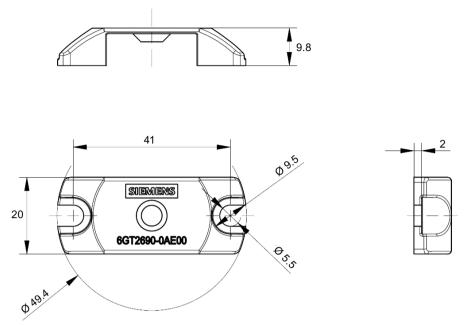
Dimension drawing of fixing hood 6GT2690-0AE00
